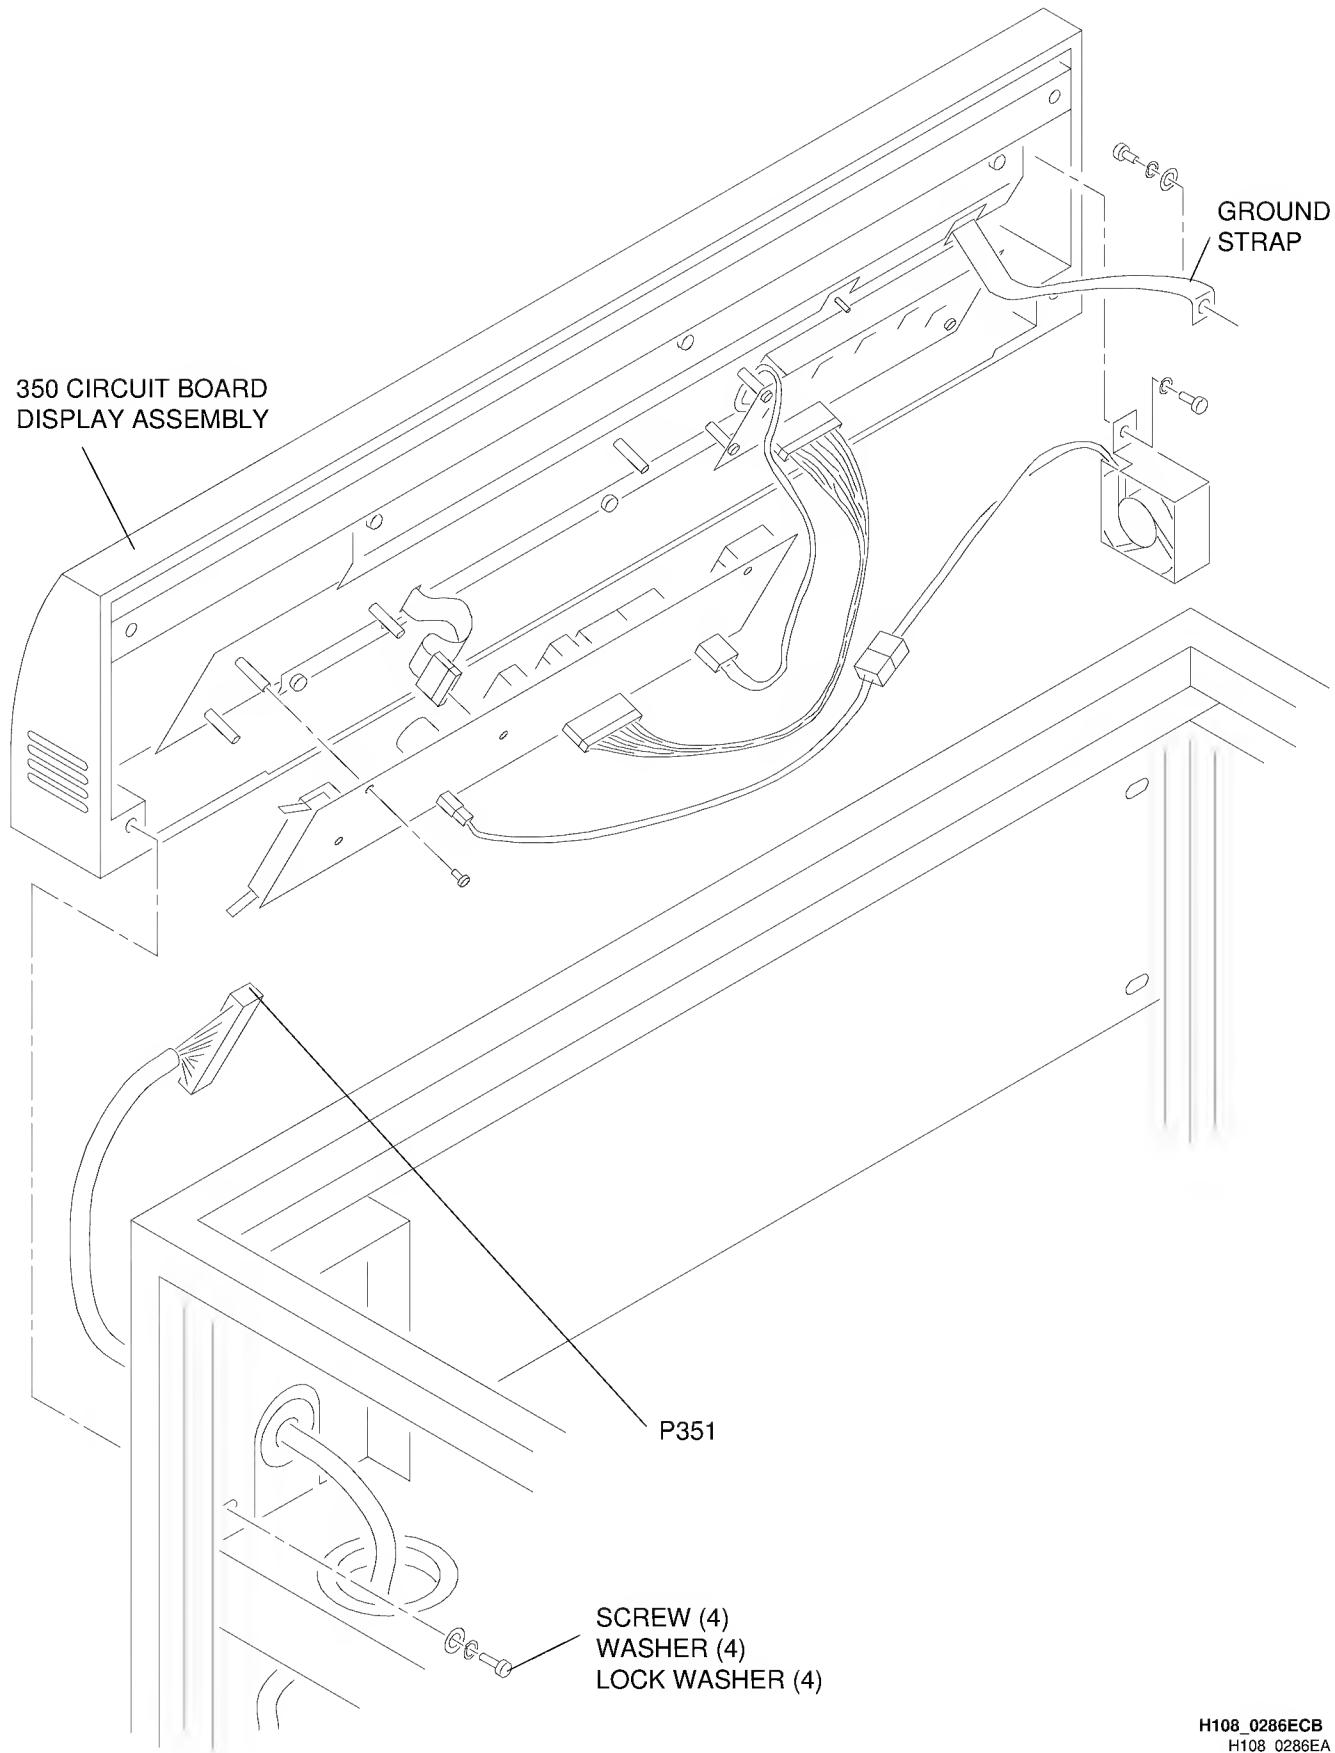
Removing the 350 Circuit Board Display Assembly
